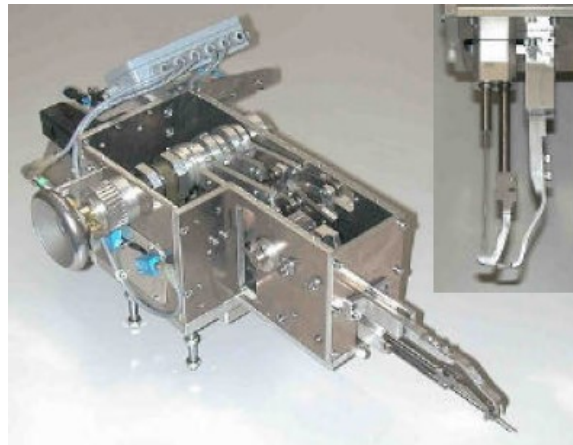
A "Tufting Head" developed by KSL GmbH, Lorrersch and DLR, Institute of Structural Mechanics, Brunswick for operation on conventional CNC machine [25].
